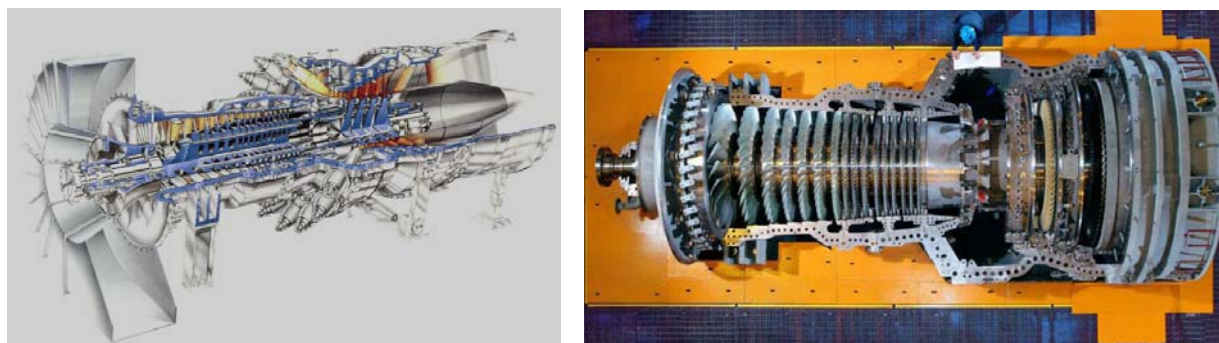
SGT6-5000F. Internal View and Overhead View of Compressor and Rotor.
